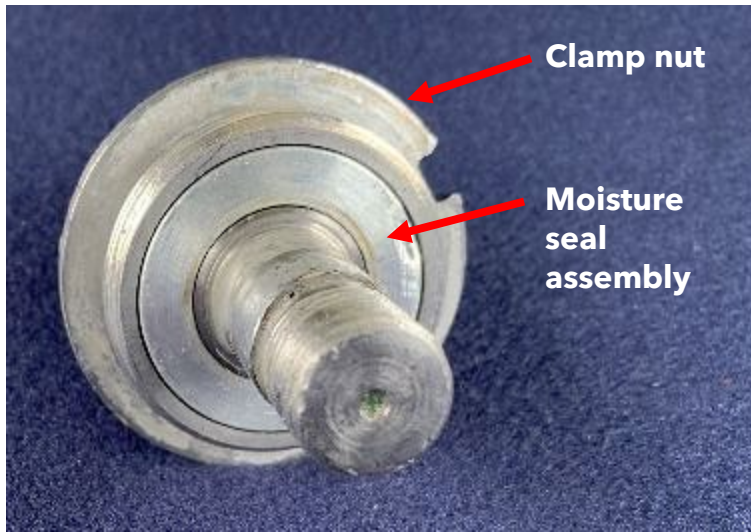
Bottom view of the clamp nut showing the moisture seal in the installed condition.
